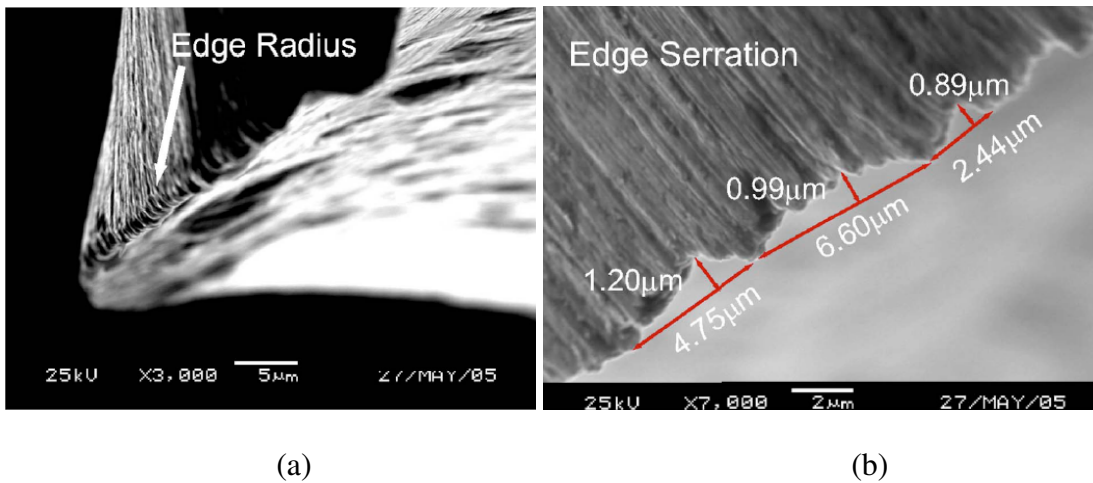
(a) Edge radius and (b) edge serration of a cutting flute of a microendmill (Liu et al., 2007a)
